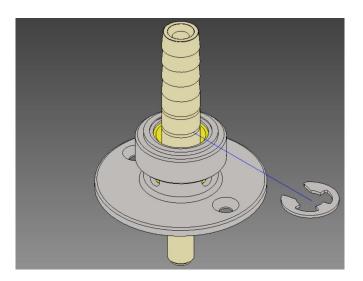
INTERNAL E-CLIP REMOVAL
